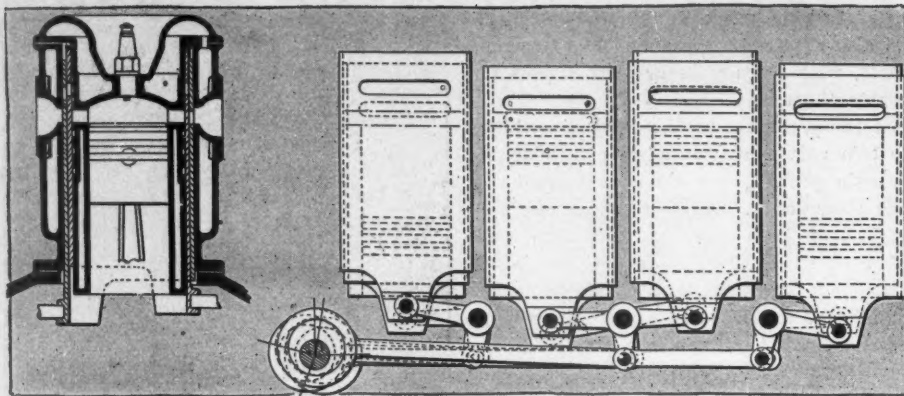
RILEY SLIDE-VALVE MOTOR, OUTSIDE SLEEVES
